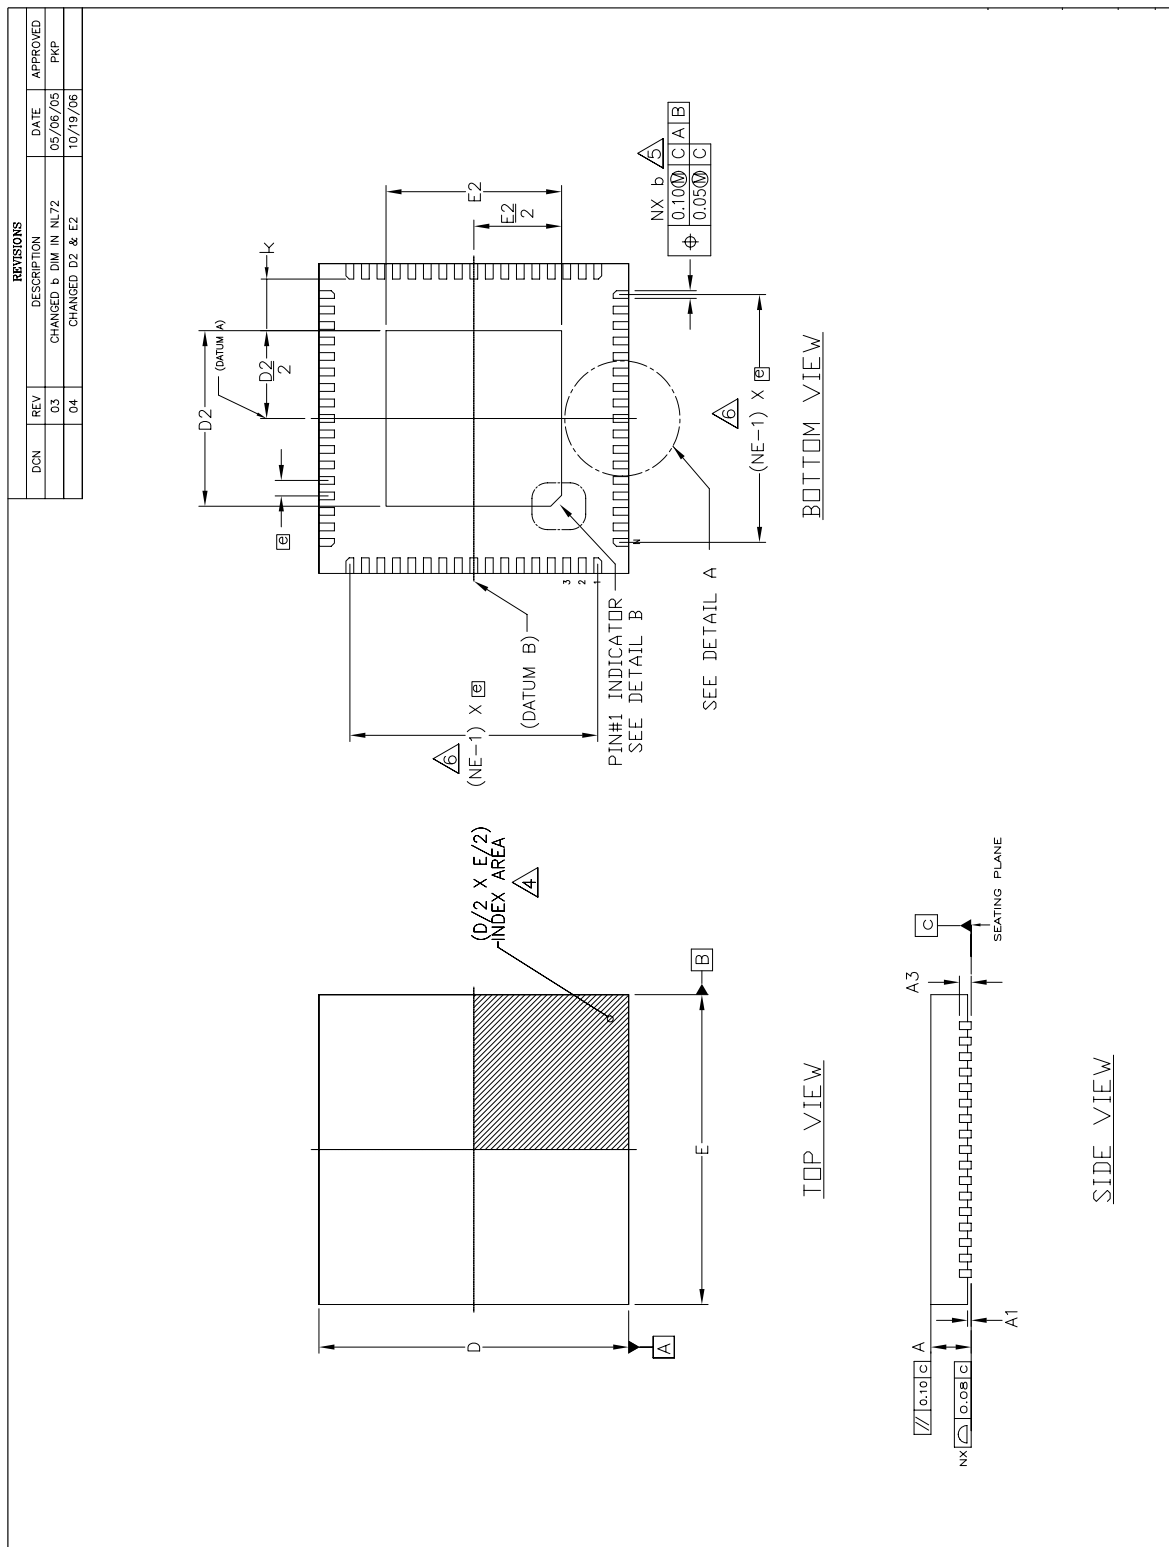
68-Pin NL Package Dimensions (a) (in Millimeters)
